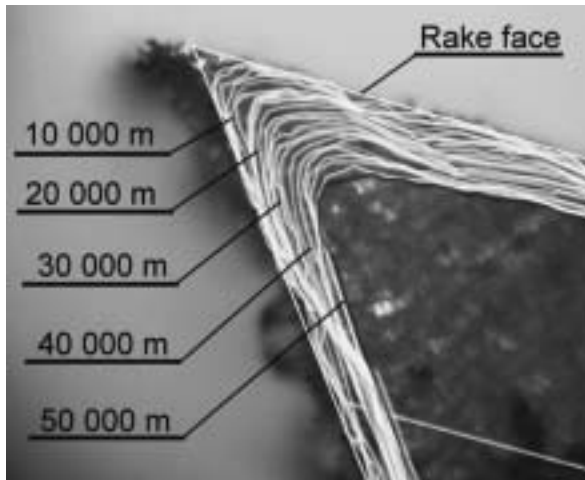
Tool wear of the cutting wedge at the clearance $p = 5$ mm
